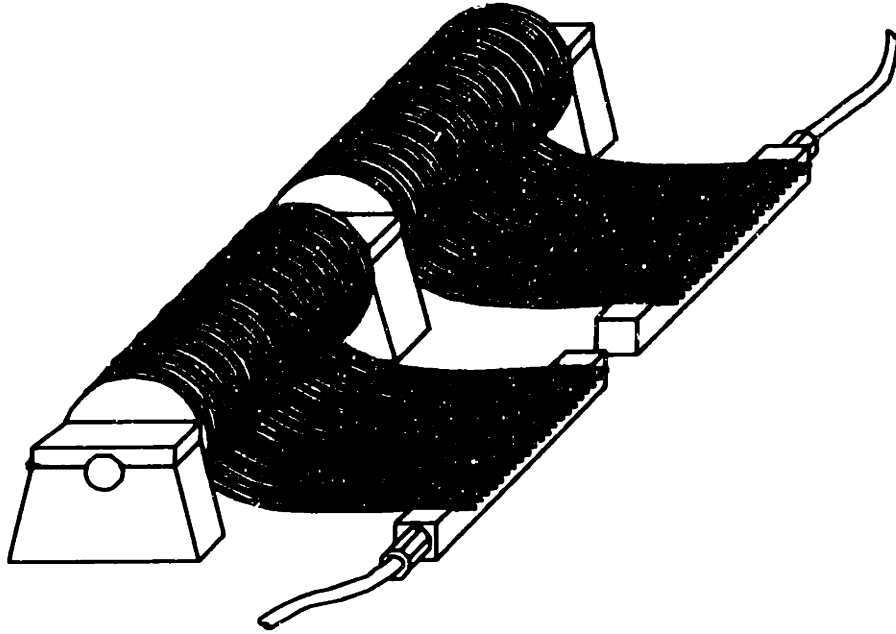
Side by side spool holder configuration shown with vacuum chuck fixture concept.
